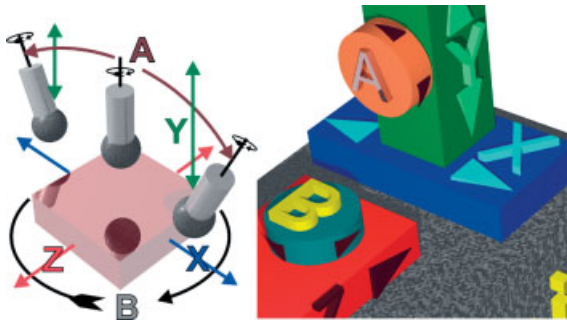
a) Five-axis end-ball milling set-up; b) detail of axes.
